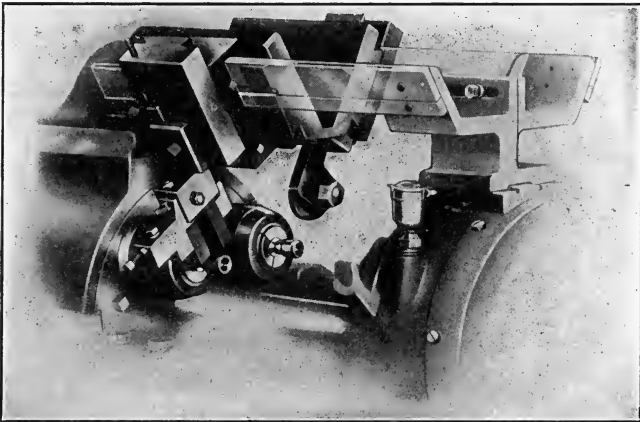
Shaving Tool and Thread Roll on an "Acme" Multiple-spindle Automatic
